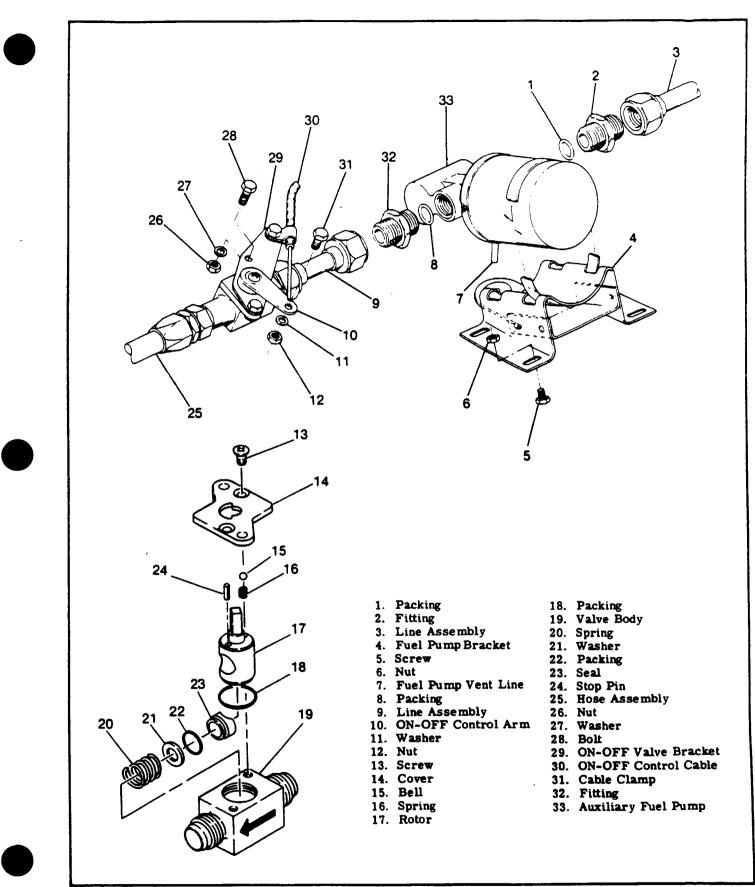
Auxiliary Fuel Pump and ON-OFF Valve
